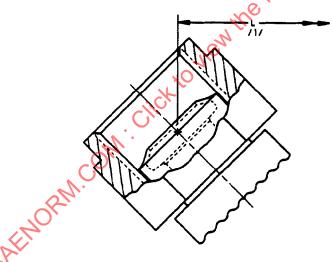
FITTINGS (ENLARGED VIEW)
